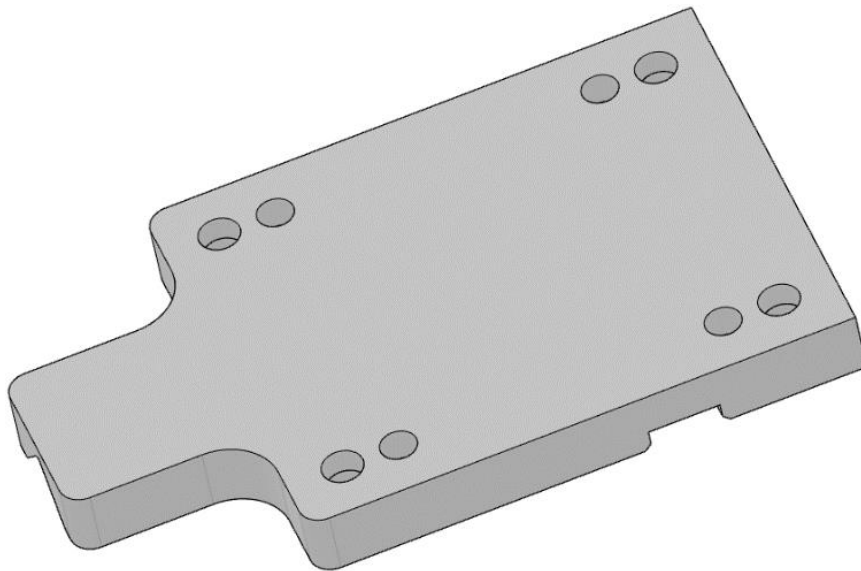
Concept 3 with visible holes for the cylindrical pins. The plate have the dimensions 400x200x35mm
